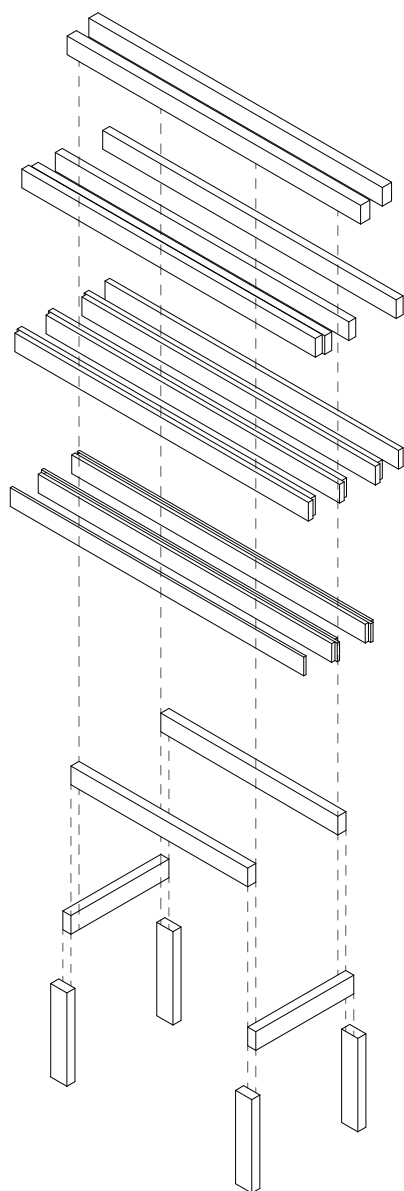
Axonometric exploded view of the Gees Recycling bench components.
